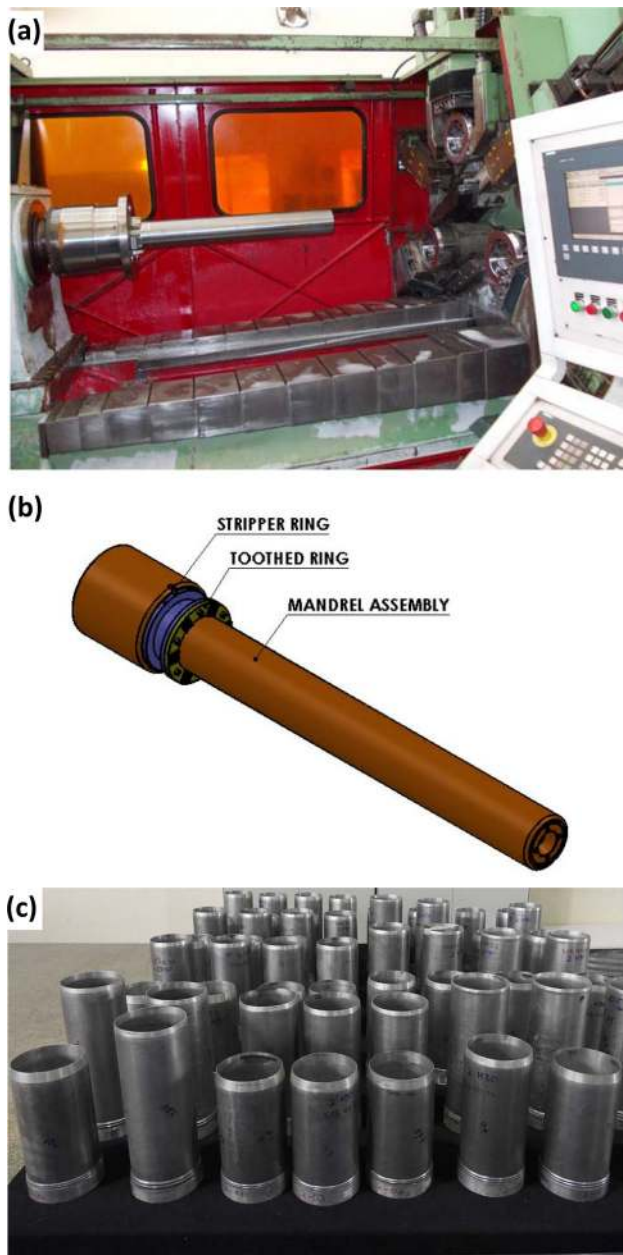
a Photograph of flow forming machine, b mandrel assembly, c flow formed tubes produced using the range of processing parameters
